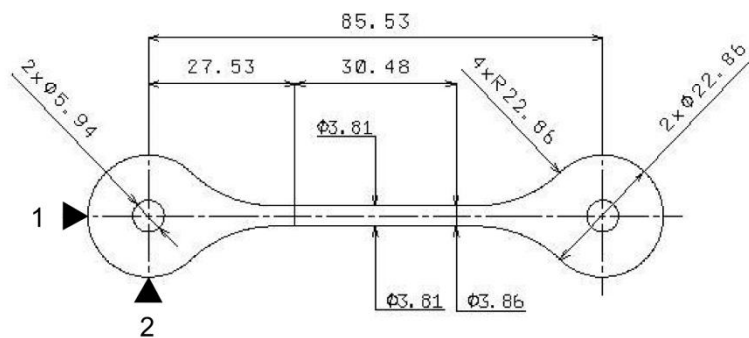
Small MIM tensile test specimen drawn from MPIF Standard
